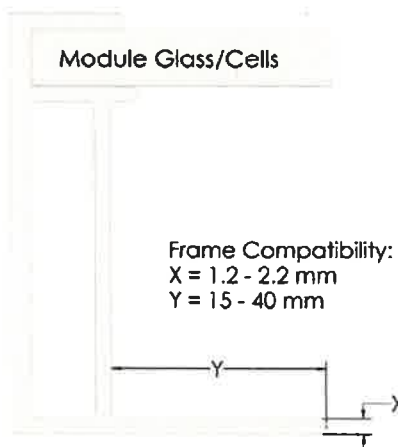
CAMO Clamp Module Frame Dimensional Requirements
